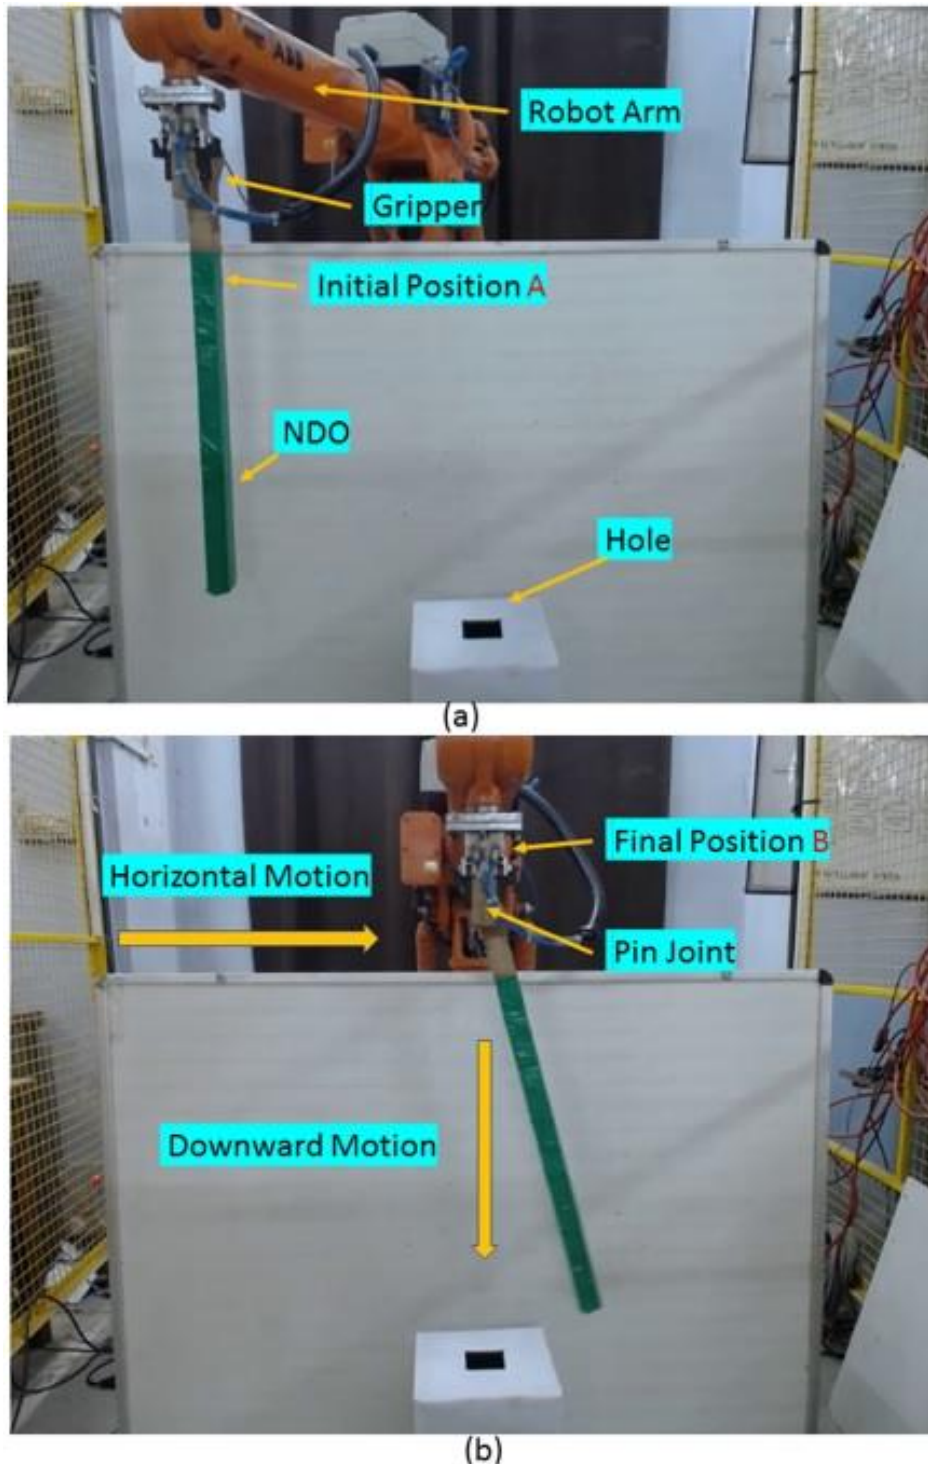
Front view of the set up for peg in hole assembly problem, (a) robot with NDO at initial position A and (b) robot moved to final position B.
